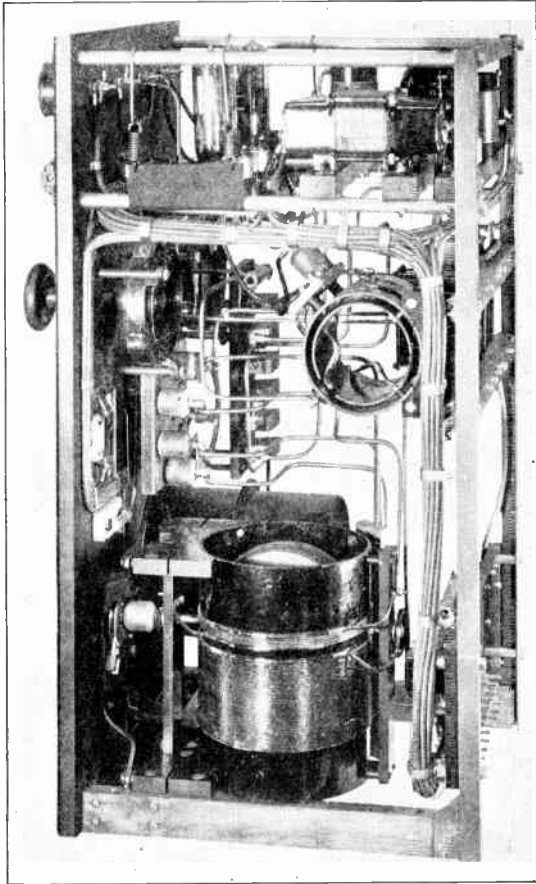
Side View of Assembly of Model ET-3627-A Transmitter.
